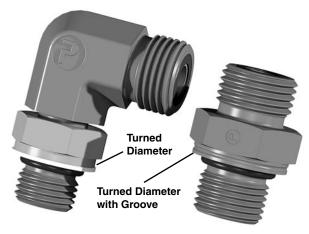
Metric Seal-Lok Straight and Shaped Connectors with Identification for use with ISO 6149-1 Port
